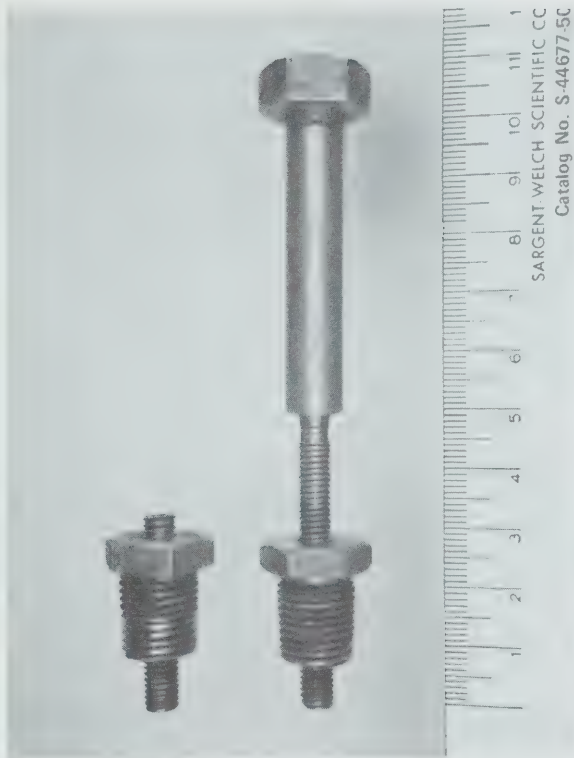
A broken and intact actuator rod, inserted into a brass plug.
